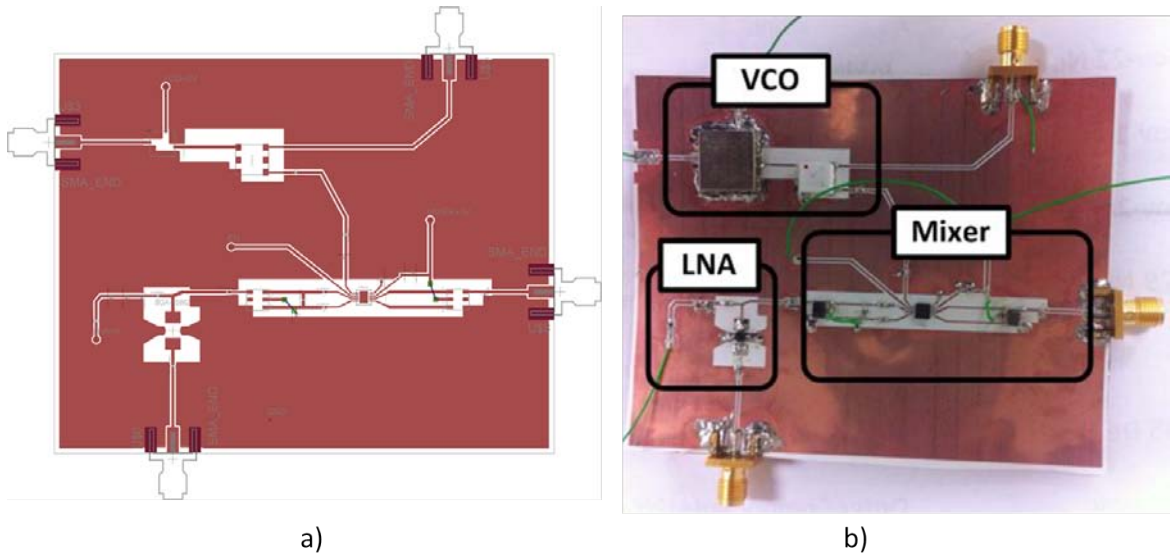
Full system assembled on inkjet printed flexible substrate technology.
